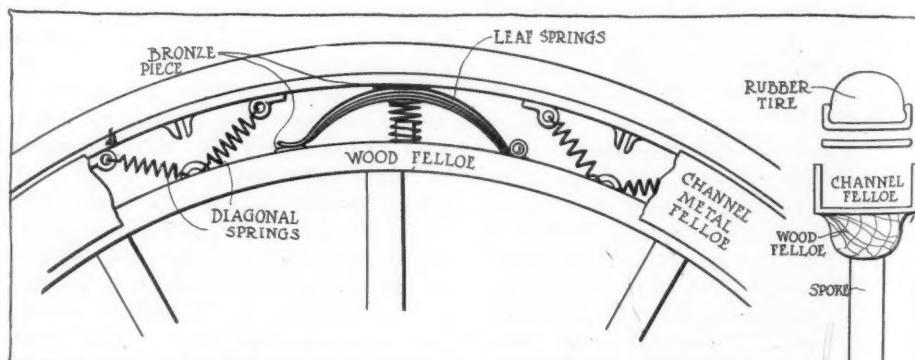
COMFORT WHEEL, A CALIFORNIA INVENTION
